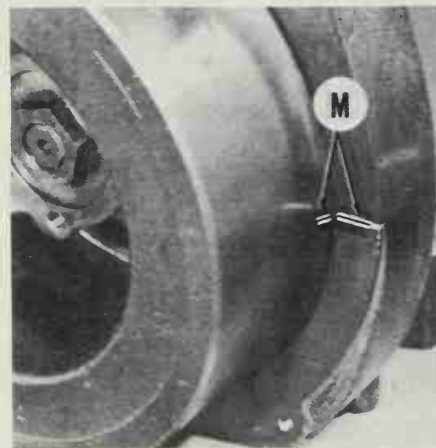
Piston is at top dead center when marks (M) on flywheel and crankcase are aligned.
